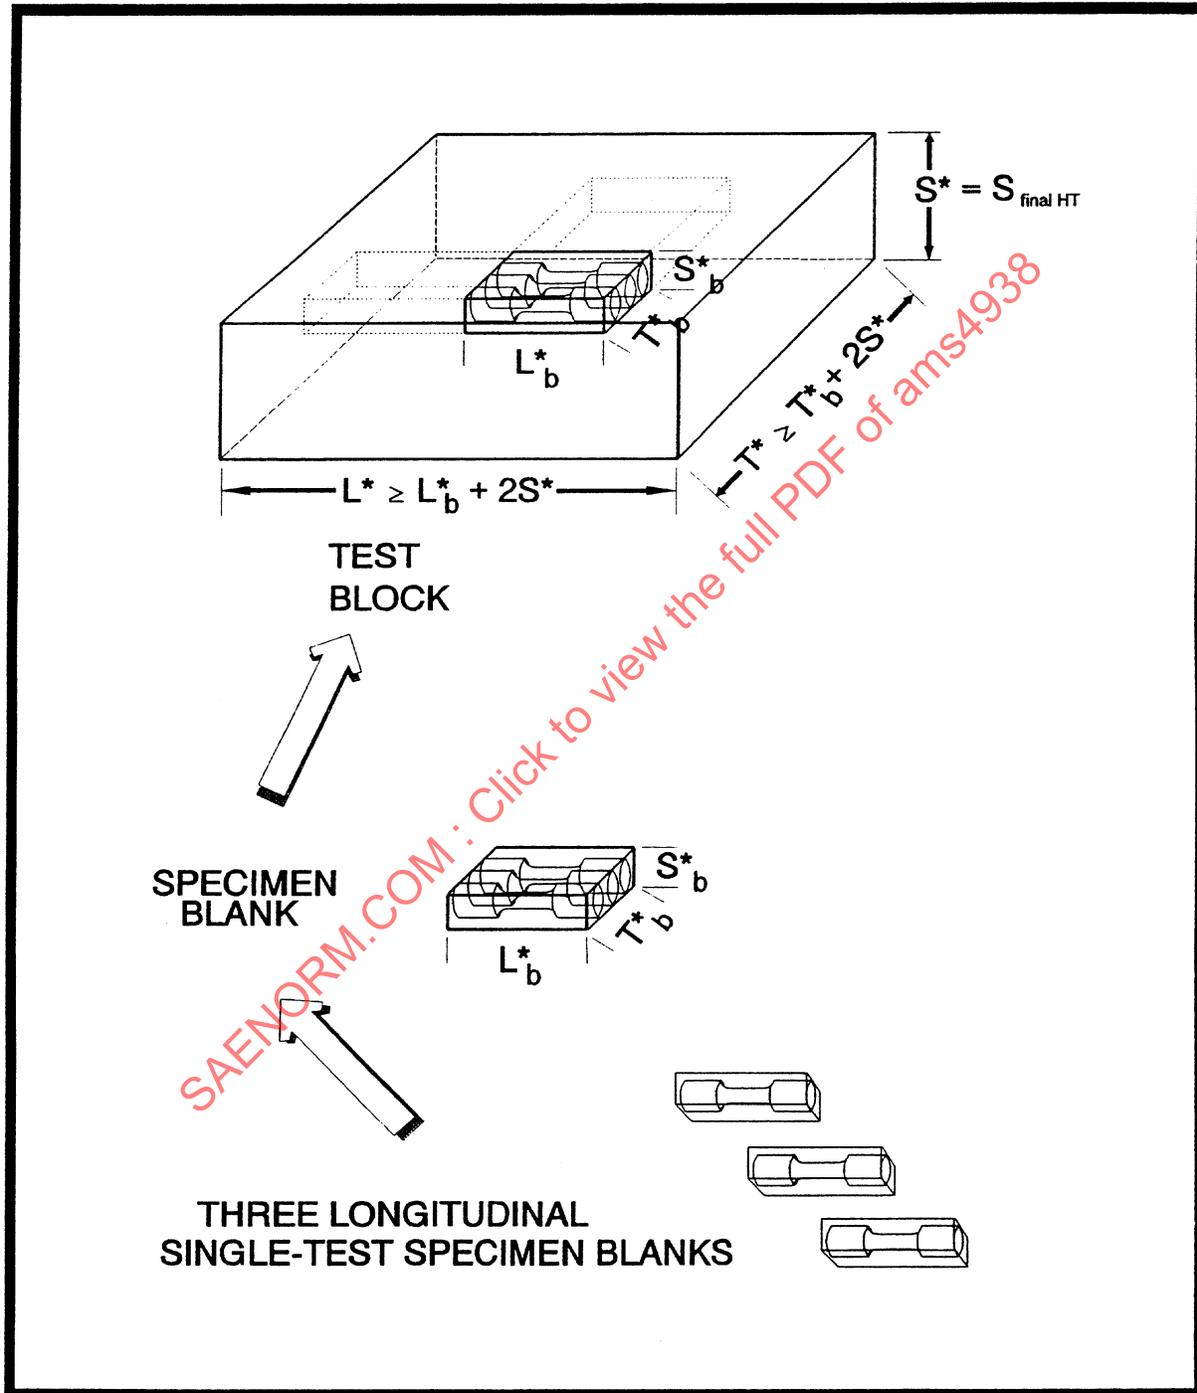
Longitudinal Specimen Blank Design and Test Block Design
